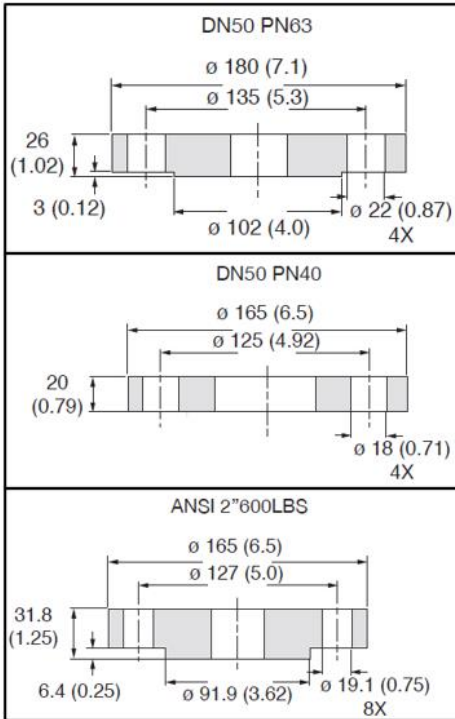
Flange dimensions SX42 flanged model according EN 1092-1
